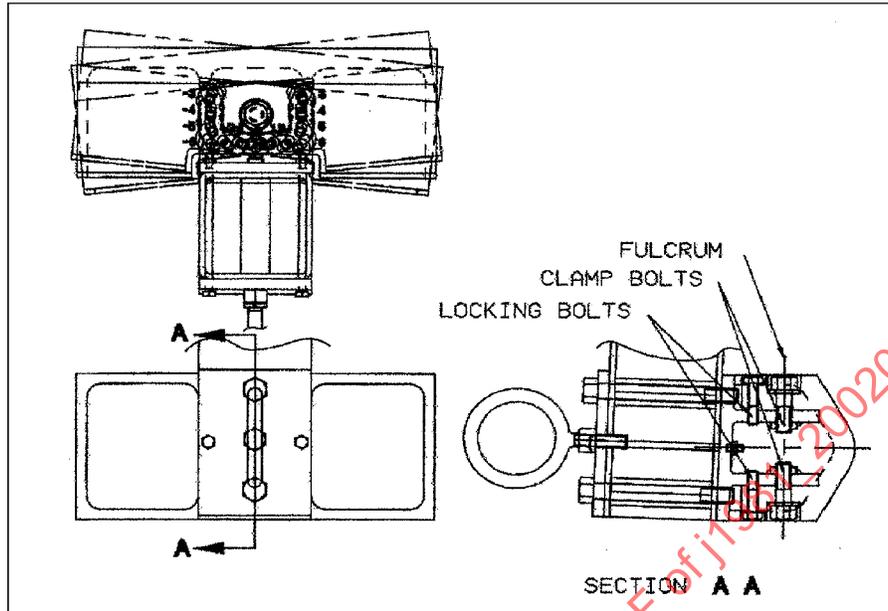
SAE J1981 STRIKER ASSEMBLY
